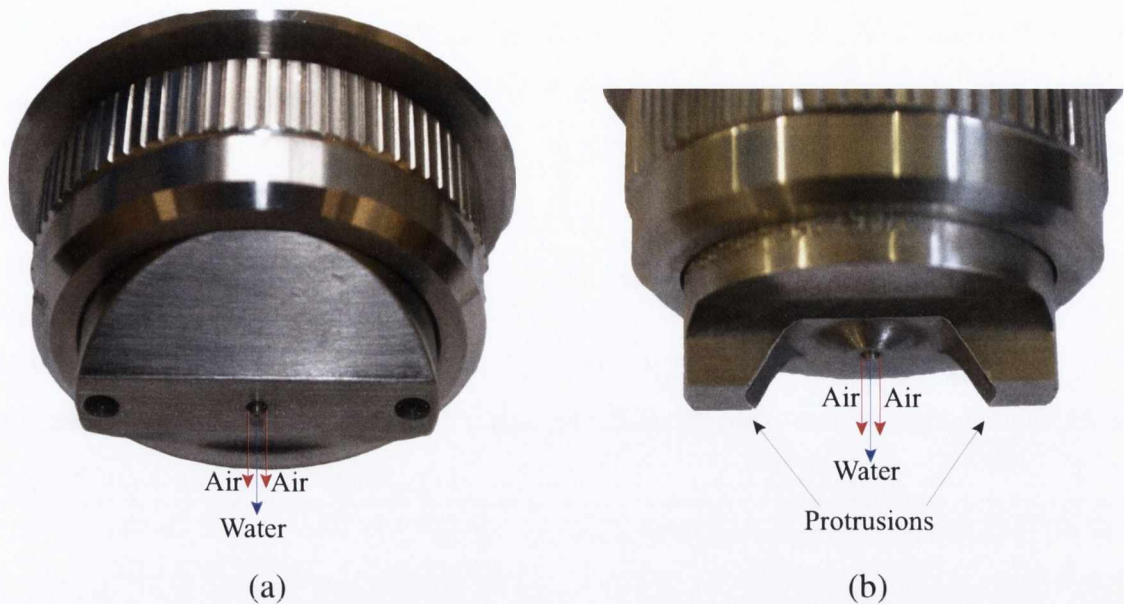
Magnified view of (a) the machined mist jet nozzle and (b) the original mist jet nozzle
